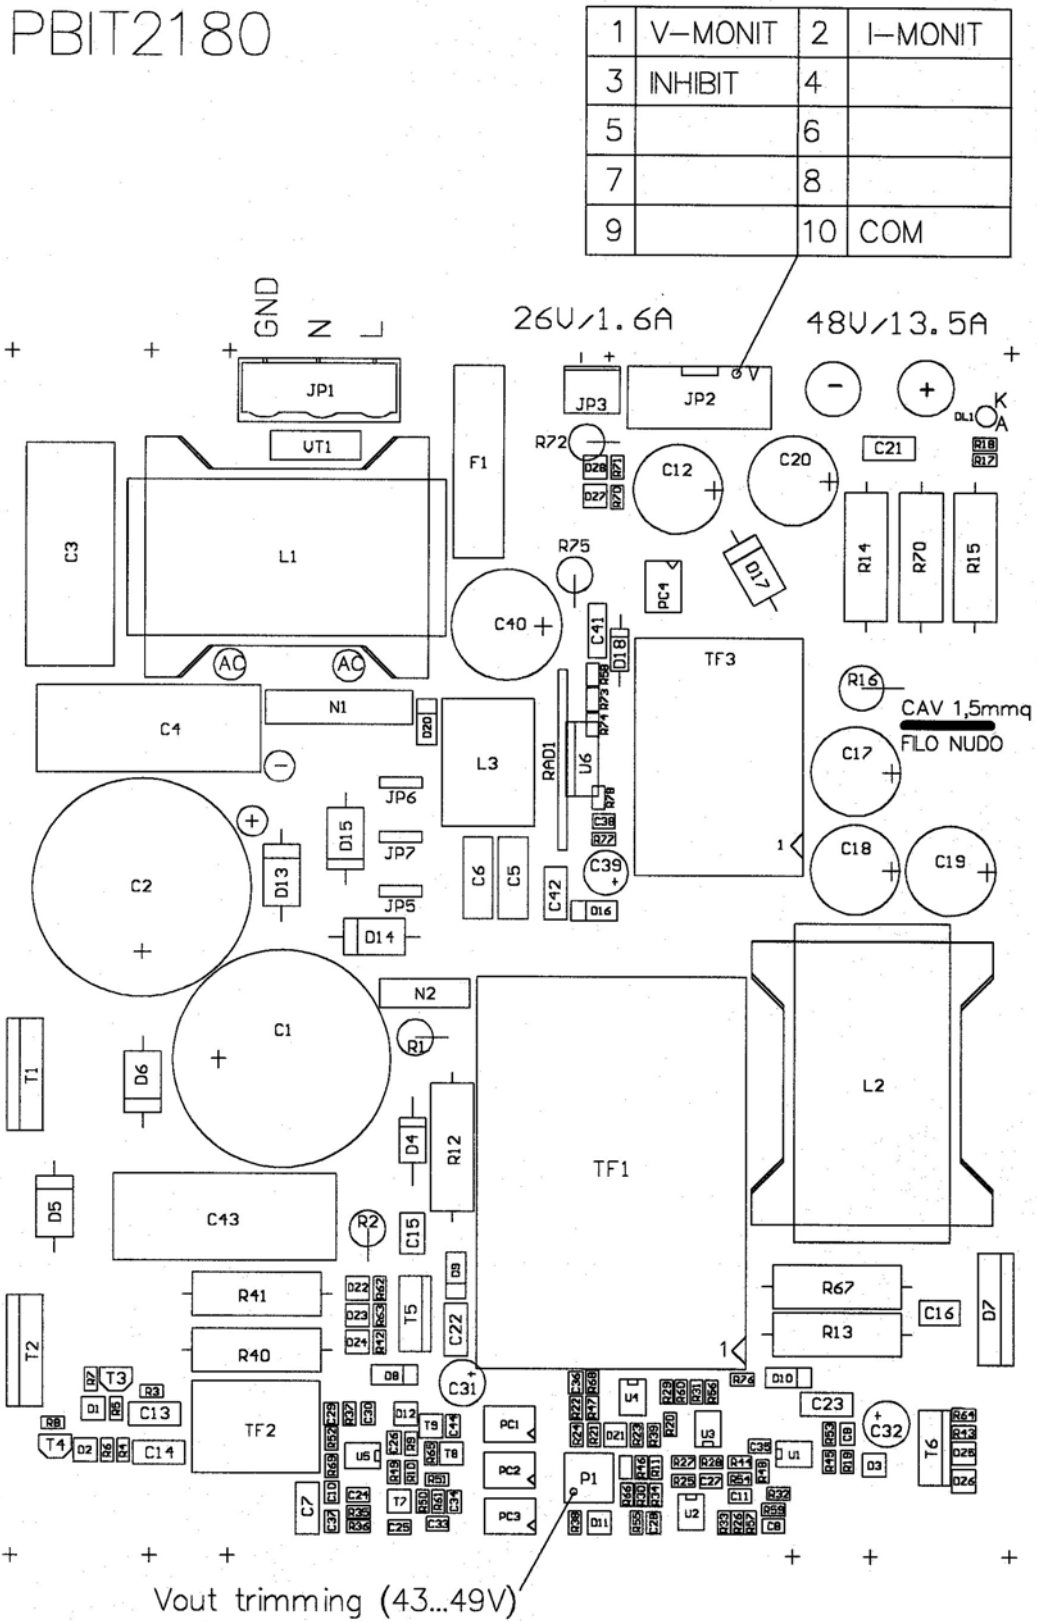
SWITCHING POWER SUPPLY MODULE COMPONENT LAYOUT
